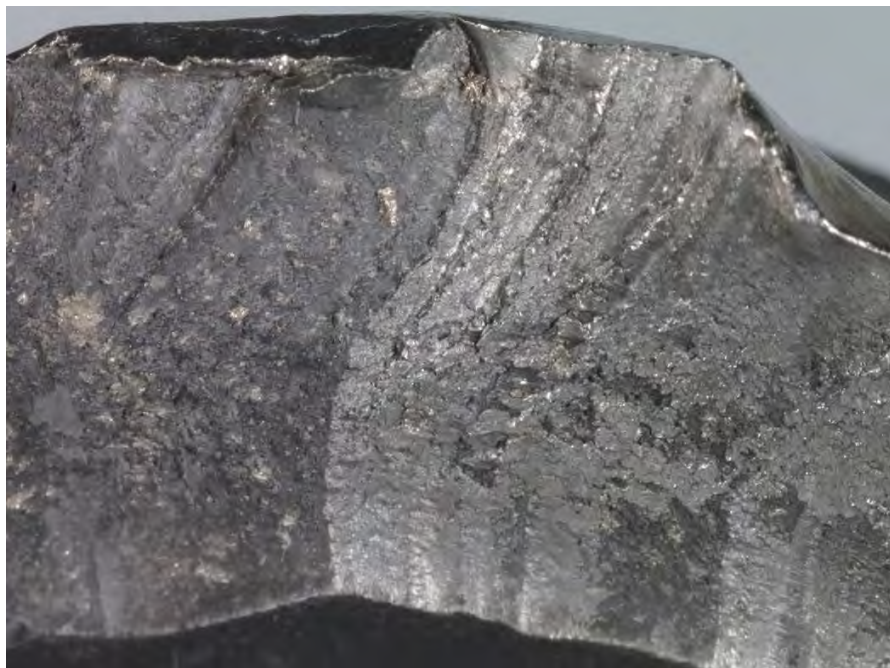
Close-up photograph of blade airfoil fracture surface shown in Fig. 283.
